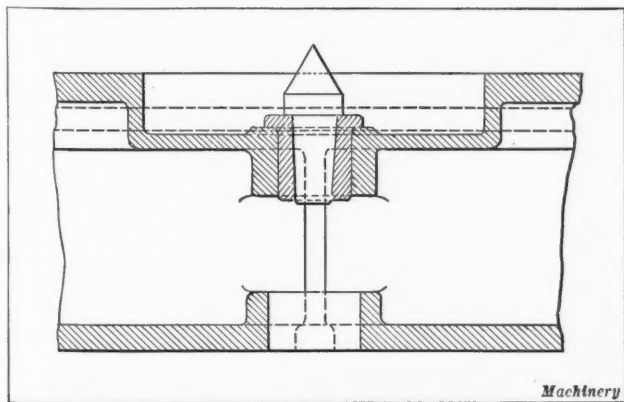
Center provided on Heavy Vertical Boring Machines for supporting the Lower End of the Boring-bar
